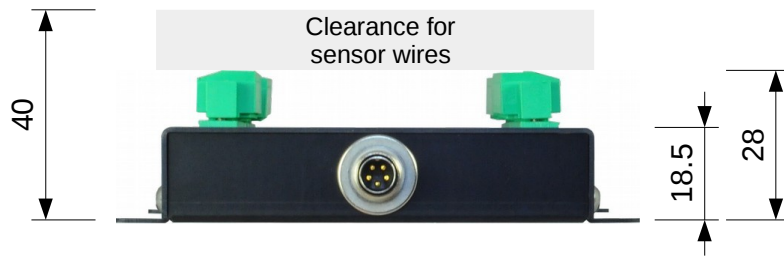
Dimensions and connection clearance of standard Daqu – Front View.
